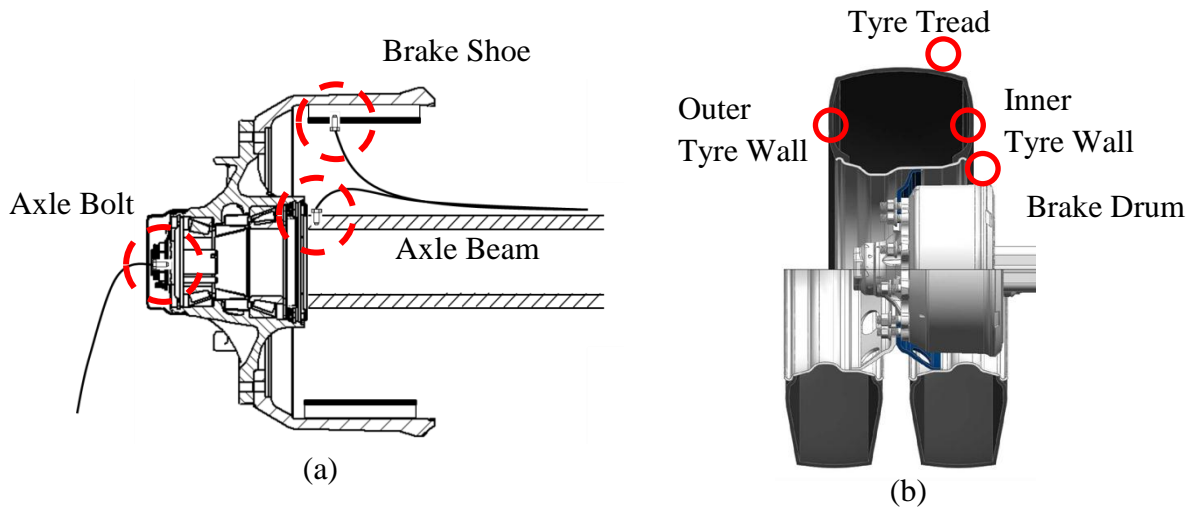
(a) Thermocouple Locations, (b) Non-contact Laser Thermometer Measurements
